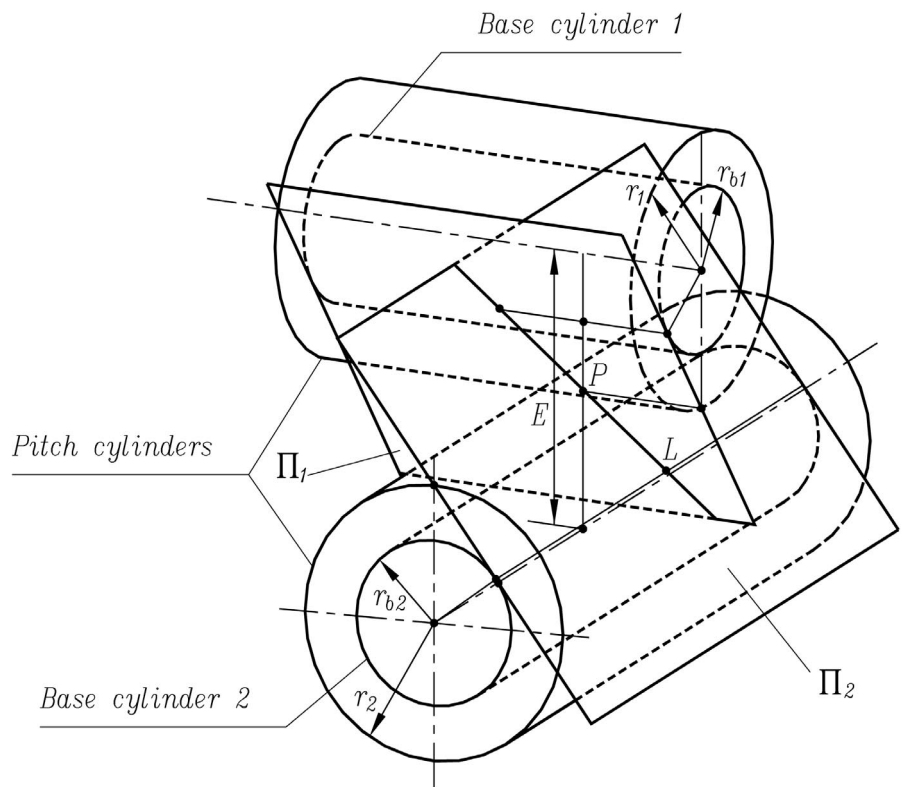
Formation of line of action in a helical gear drive with crossed axes.
